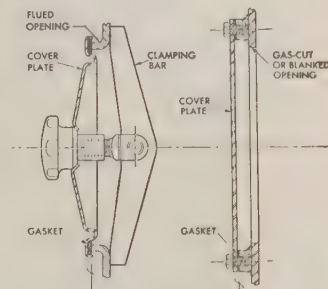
THE FORMED SEAT COVER AT THE LEFT IS DESIGNED TO BE FASTENED BY AN INNER CLAMP
